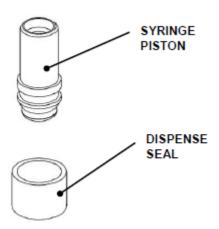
Inserting a Syringe Piston into the Dispense Seal
